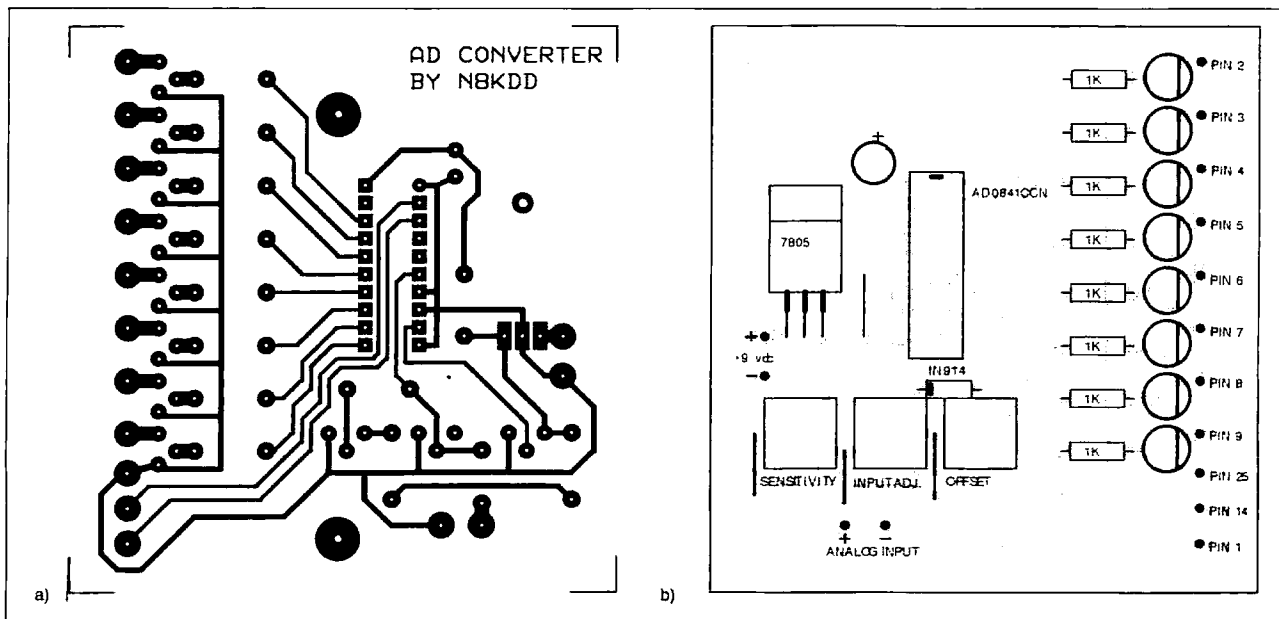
(a). PC board foil pattern. (b). Parts placement.
